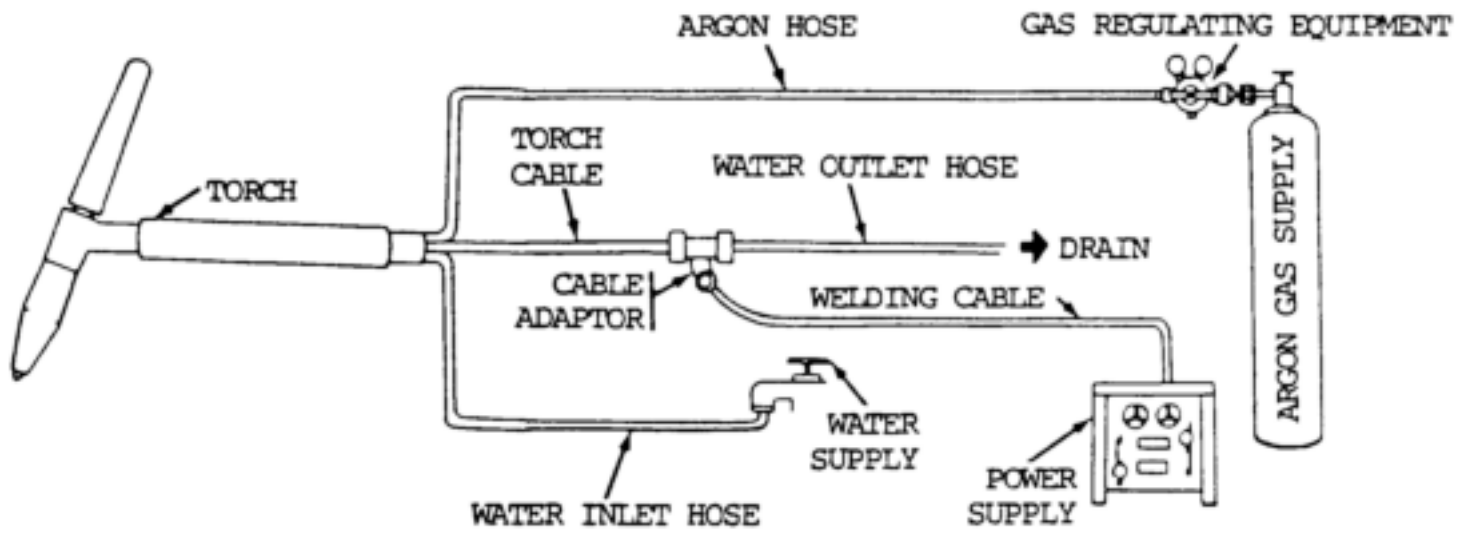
Gas tungsten-arc welding setup.
